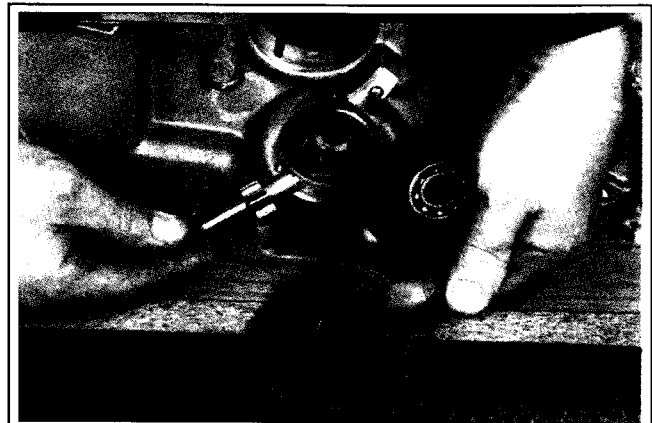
Oil Pump Ball Bearing, Wear Plate, Rotor, Shaft, and O-Ring.
